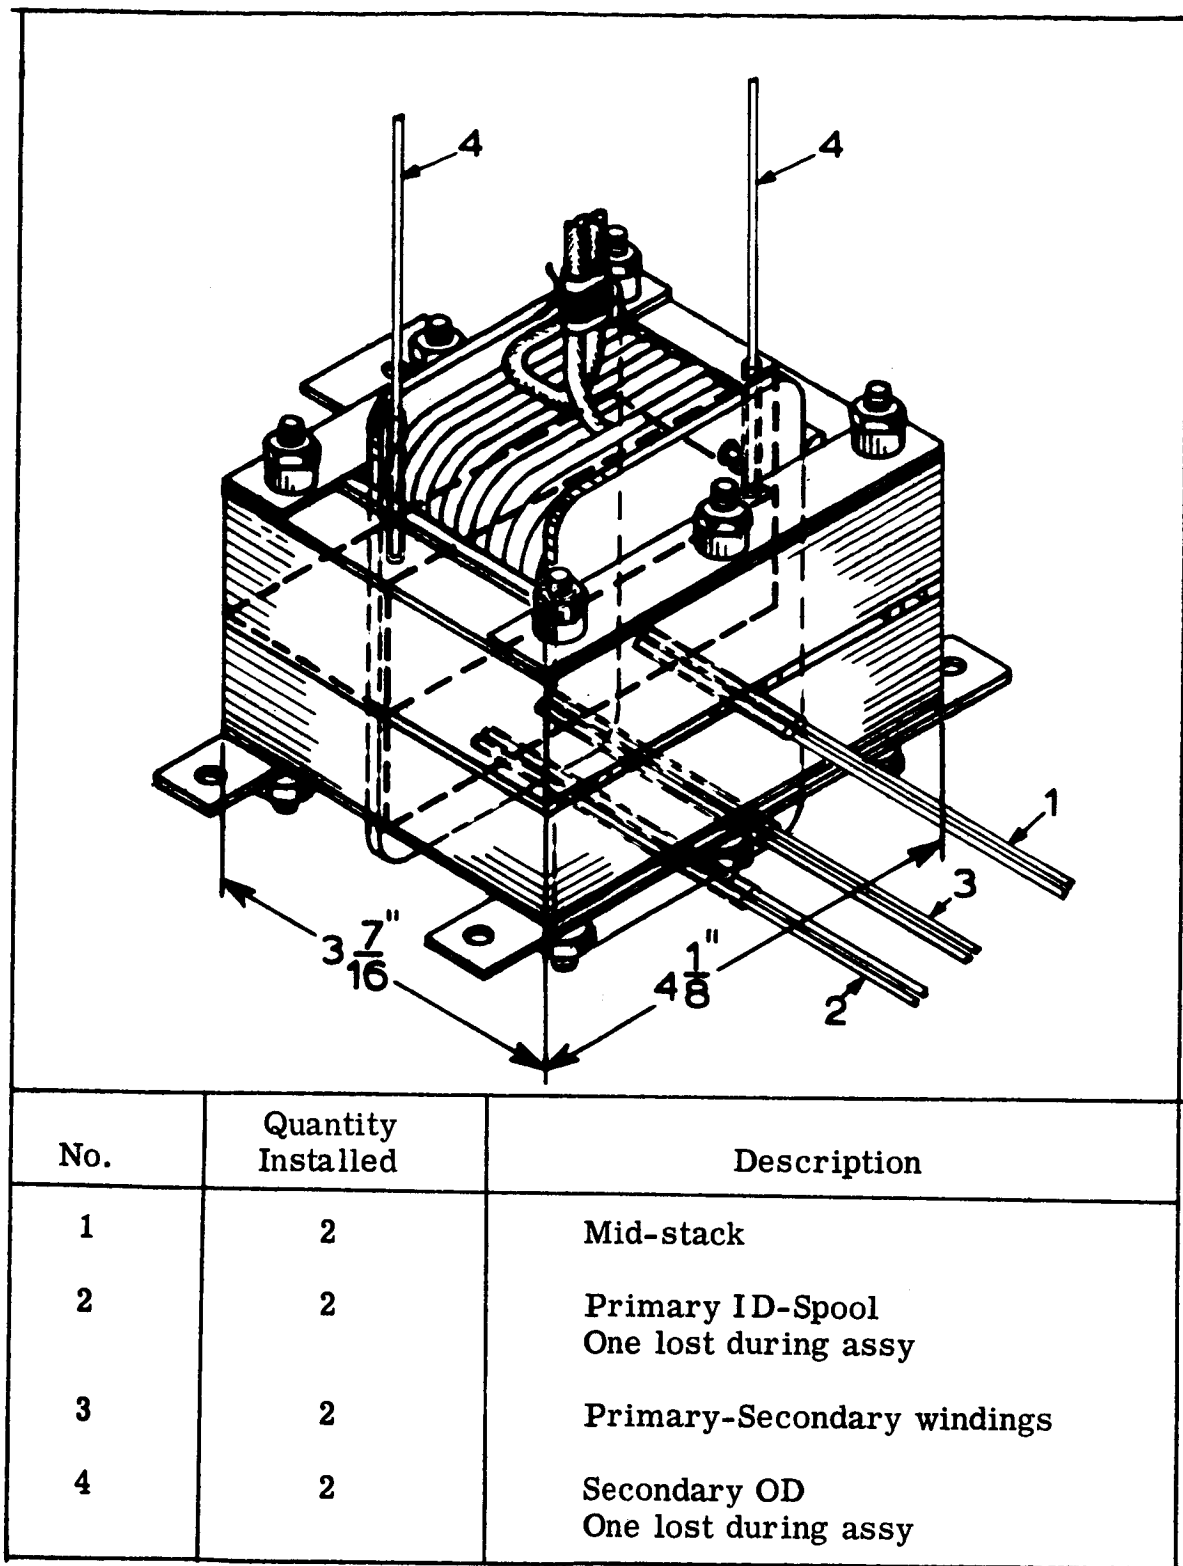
Transformer Assembly Showing Thermocouple Locations and Junction Positions
